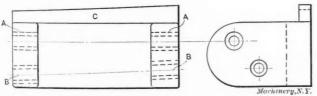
Boring Jig for Boring Holes placed at an Angle to each other.
